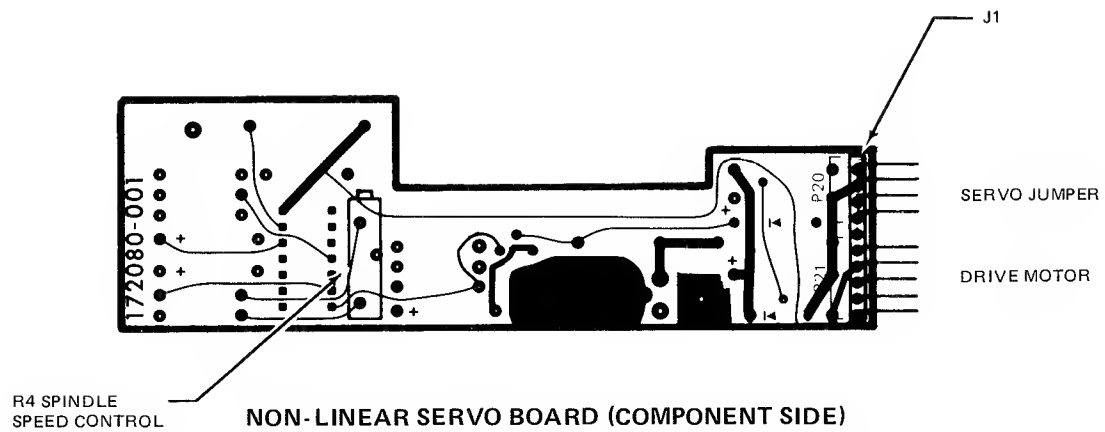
A. P.C. BOARD COMPONENT LOCATIONS
